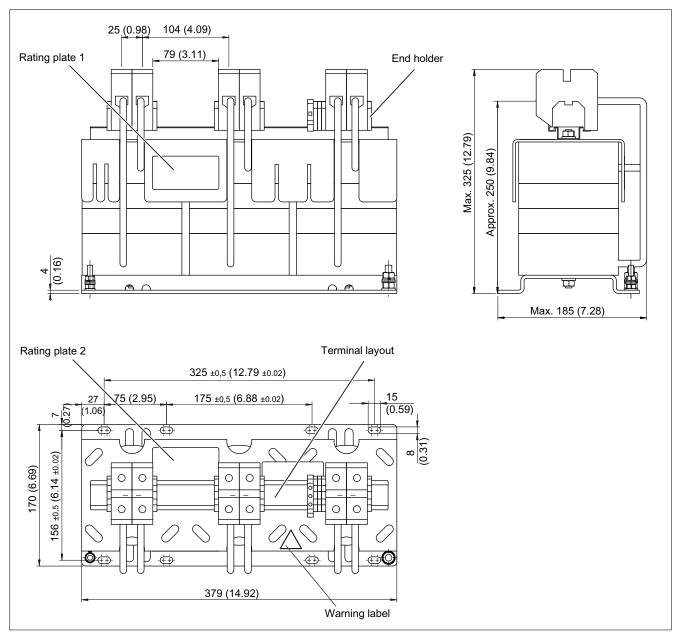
Dimension drawing of HFD line reactor 80 kW, all dimensions in mm and (inches)
